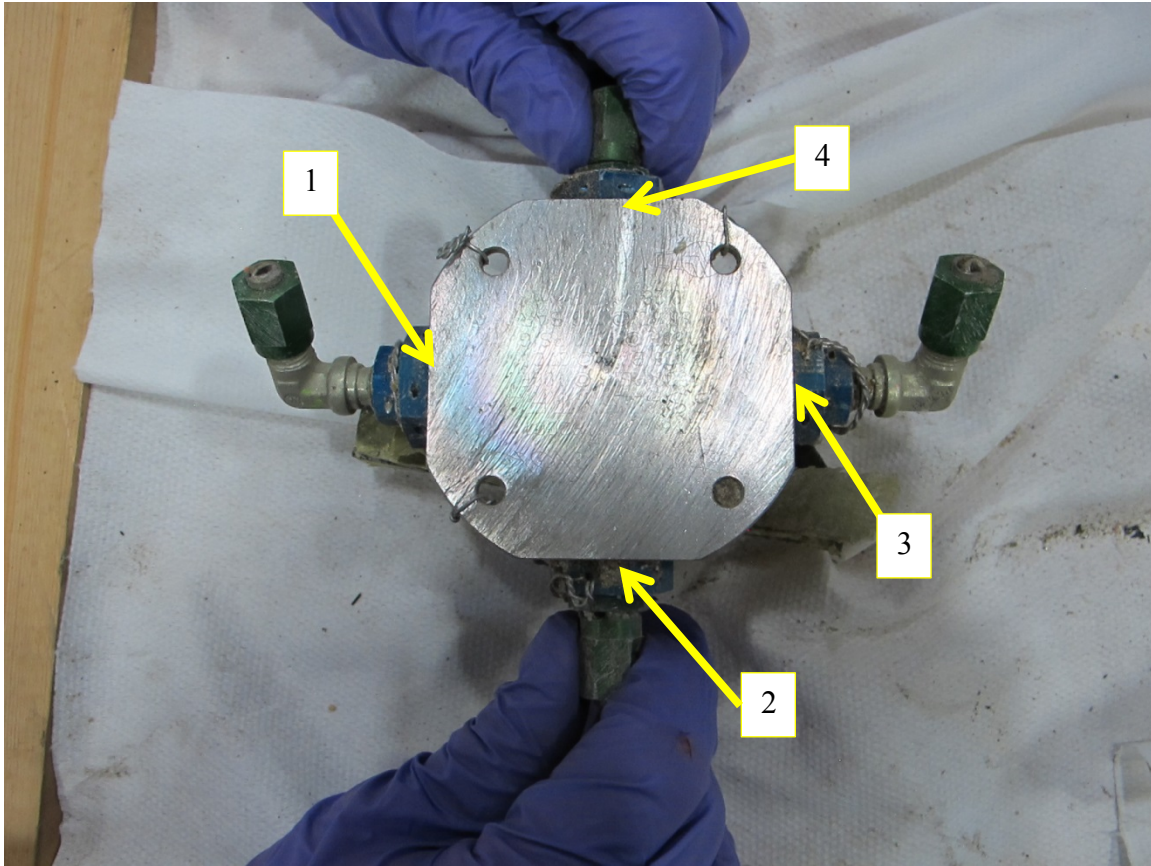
Feather lock valve with ports identified (after support structure removed)
